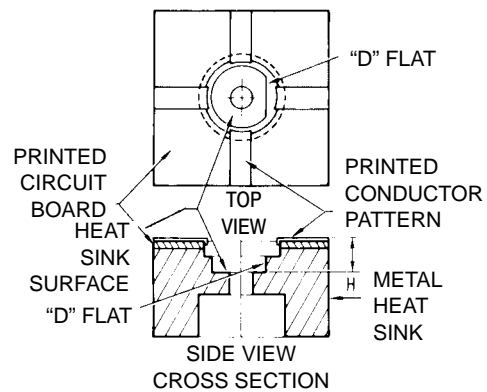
Typical Stud Type SOE Transistor Mounting Method
